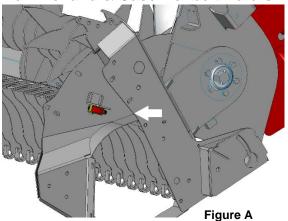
Use one existing bolt on opposite sides of the baler to mount initially (Option 3 Mounting Style). Use a straight edge or the built in alignment tool to mark the hole 5/16" and attach with the 5/16" x 3/4" carriage bolt and flange nut.
